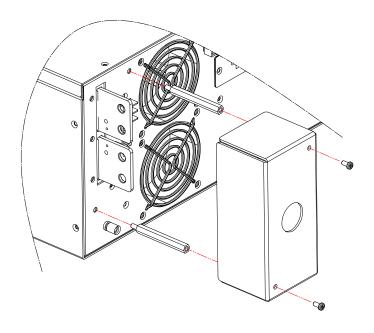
Assembling the Rear Safety Cover of 62050P
